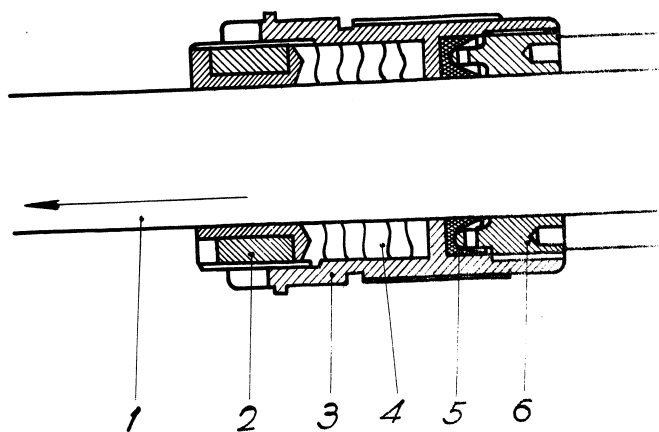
RECOIL BRAKE REAR STUFFING BOX ASSEMBLY
